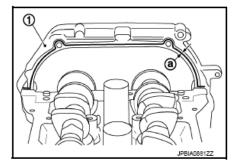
Identifying Liquid Gasket Applying Areas Of Camshaft Bracket Courtesy of NISSAN NORTH AMERICA, INC.
